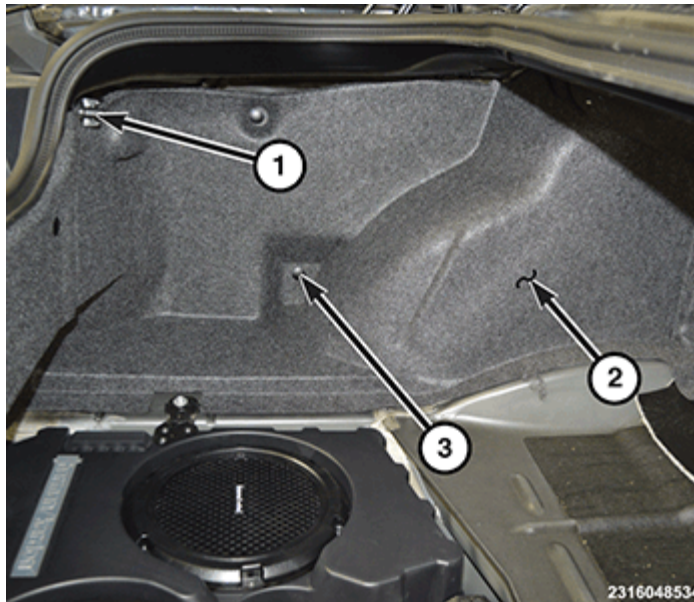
Plastic Nut, Wheel Well Carpet & Push Fasteners
